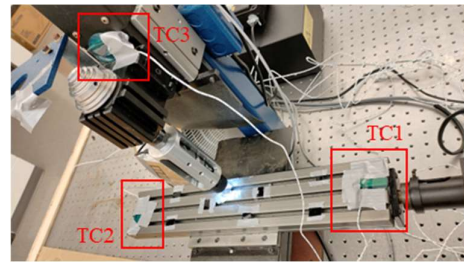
Thermocouple locations on machine tool. TC4 is located far from machine tool to monitor room temperature.
